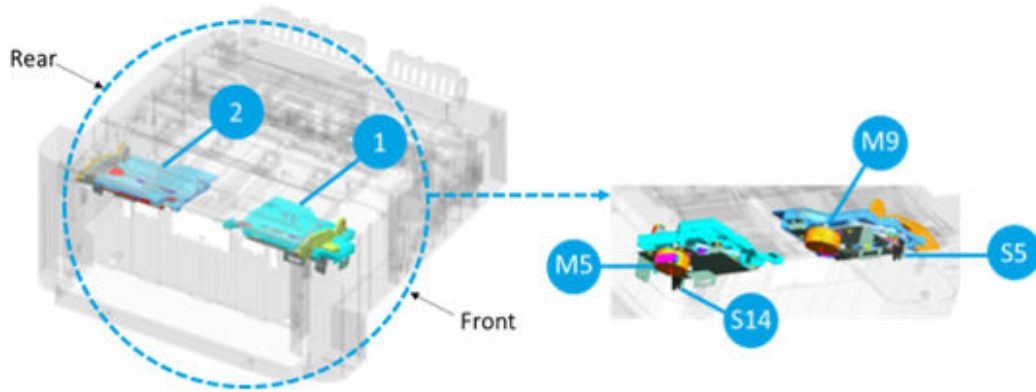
Inner finisher system - tamper unit detail view (1/3)
